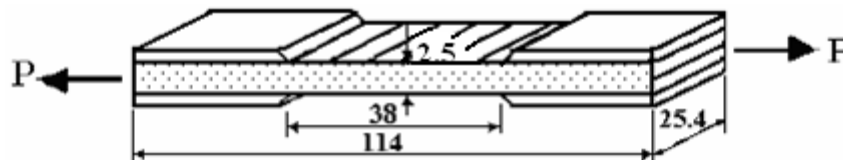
The dimensions and geometry of transverse tensile test specimen
